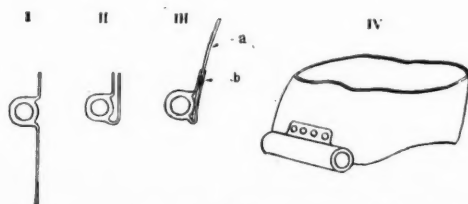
The method of joining a flanged tube to the gingival margin of a molar band: *a*, molar band; *b*, spot weld.
